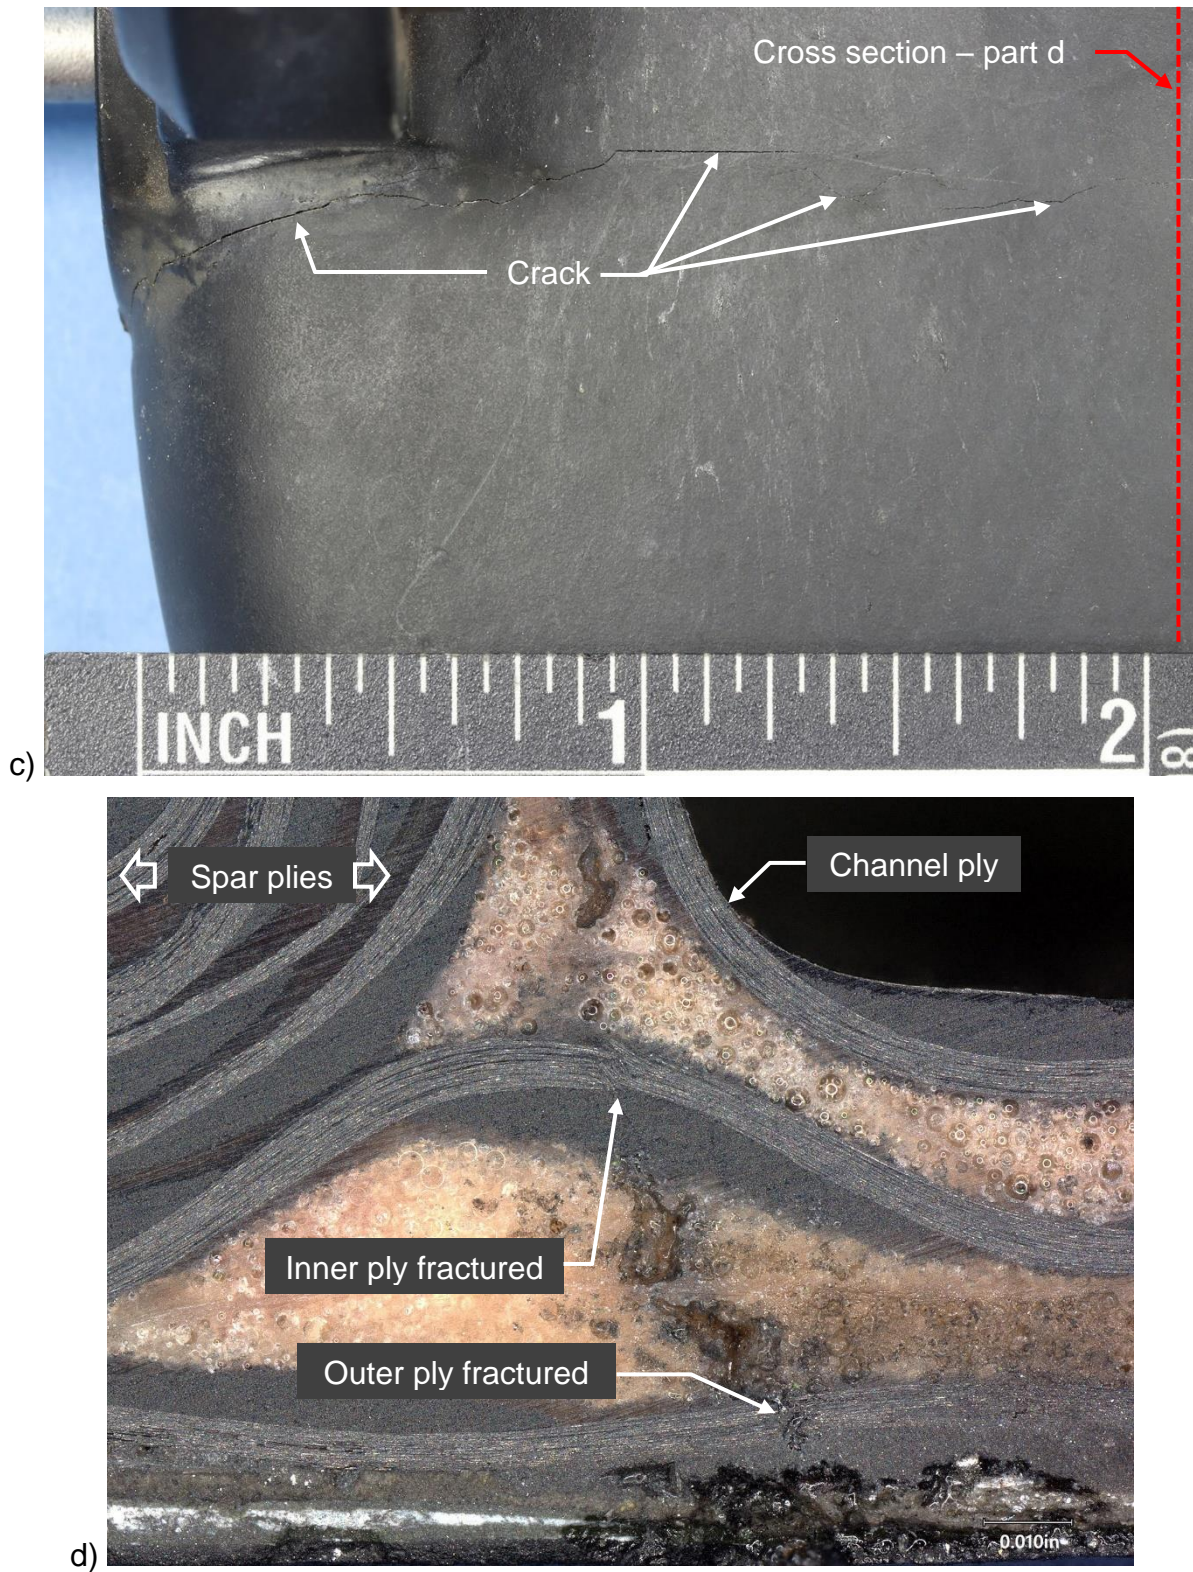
(cont.). c) lower side of closeout; and d) cross section through lower skin plies at location indicated in part c. The surface crack extended through the outer ply and inner ply.
